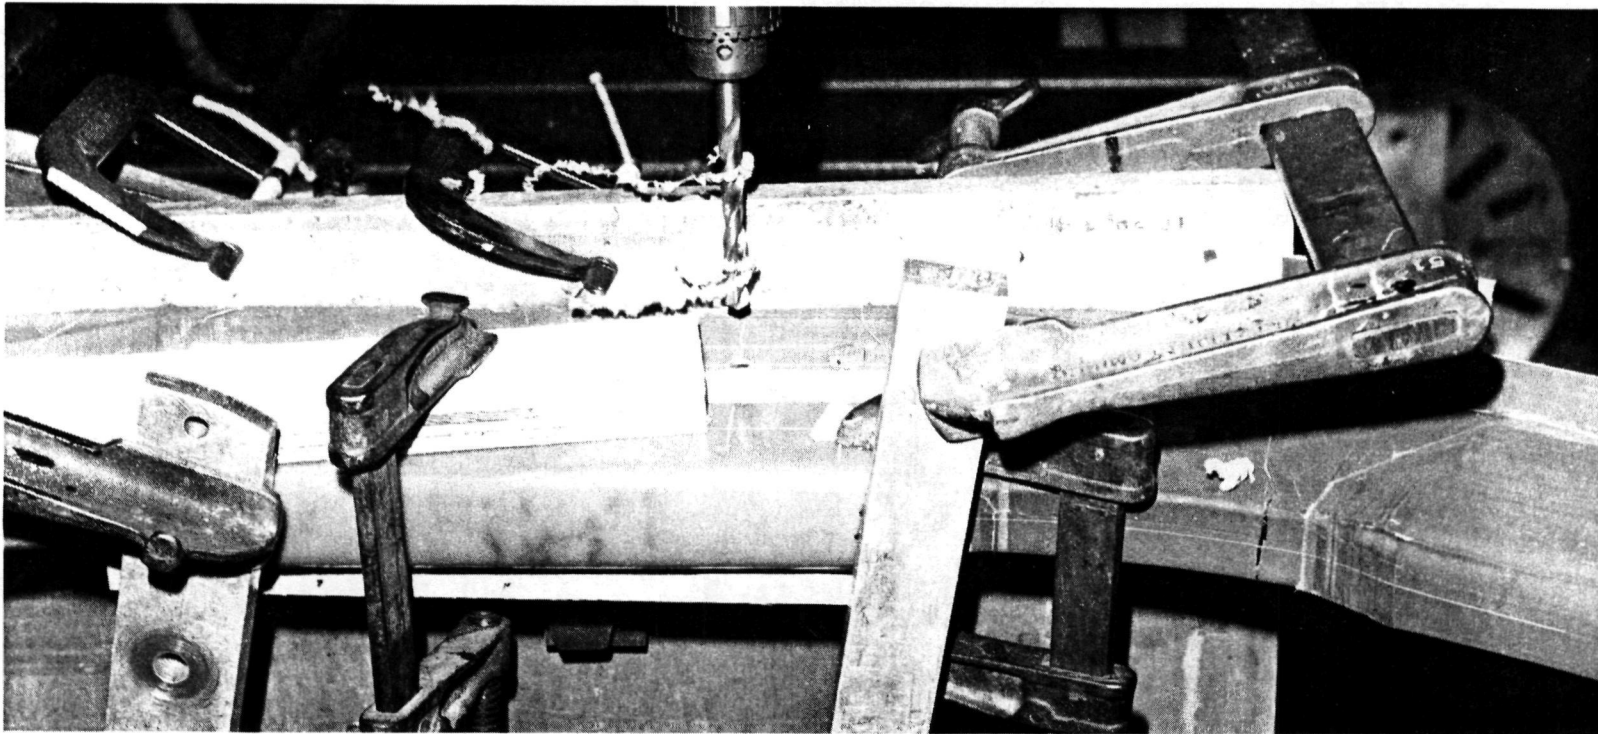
COMPOSITE FRAME SPLICE JOINT, ATTACHMENT HOLE MACHINING.
